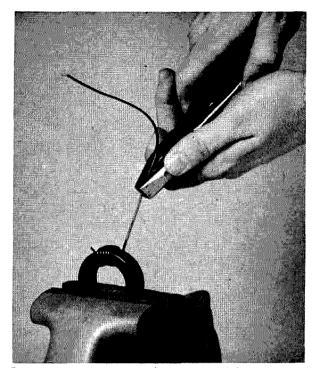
How not to wind your toroidal coils! The fragile core is sure to break if heavy wire is pulled taut with pliers. When winding toroids, the core should be hand held, and the wire pressed into place with your thumb.
